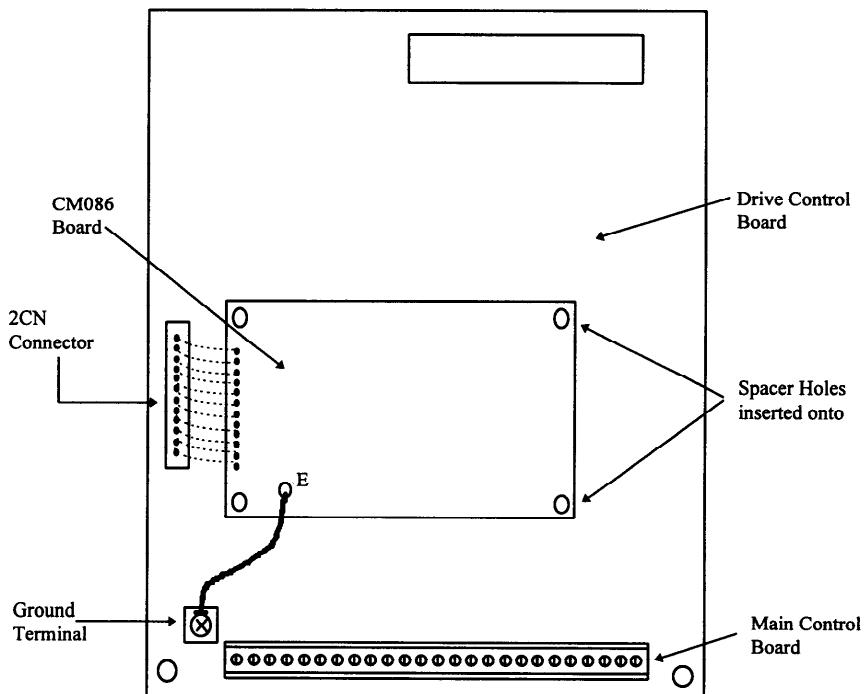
Position of the CM086 Board on the GPD 506 Drive
